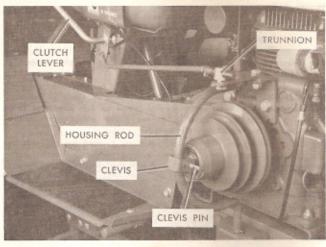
MANUAL P.T.O. CLUTCH - BELT REMOVAL
